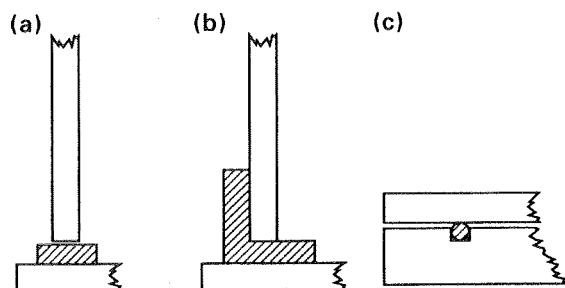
Joint seals for glass-glass, glass-metal and metal-metal; (a) gasket; (b) lip seal; (c) 'O' ring in groove.
